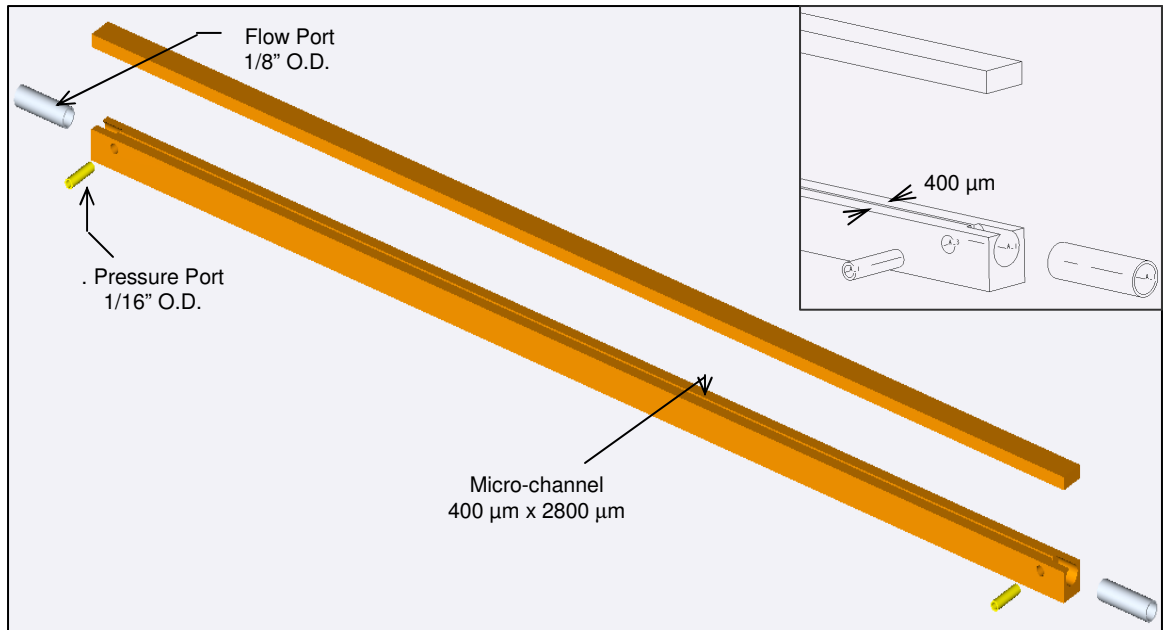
Exploded view of CAD model of the micro-channel test section. Inset: Detailed view of channel end
